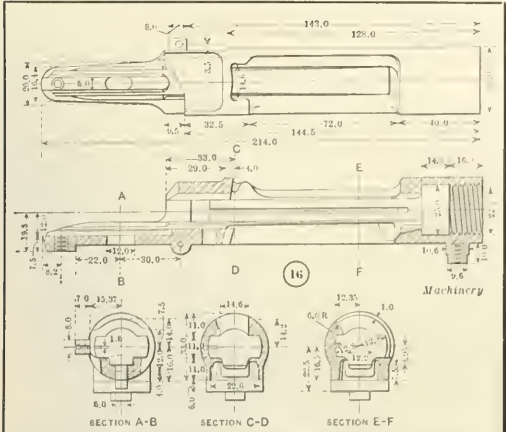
Spanish Mauser Receiver, Retaining Bolt, Trigger and Sear Parts
